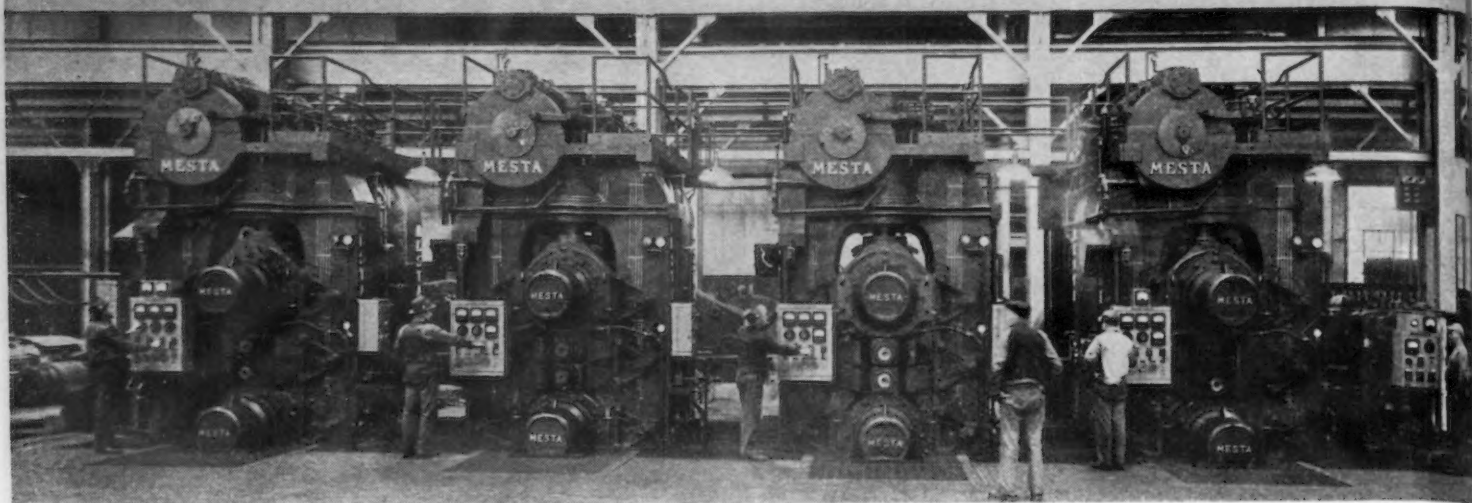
The four-stand tandem cold strip mill viewed from the operating side, showing control and instrument cabinets mounted on mill housings.
